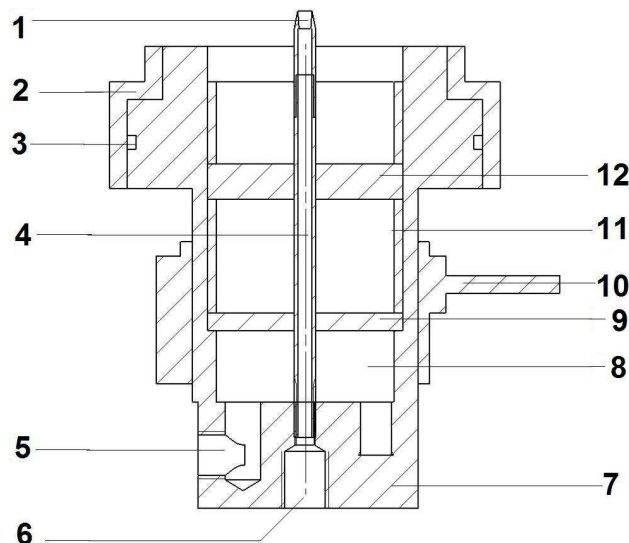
High pressure burner assembled parts. 1: Exchangeable fuel tube tip, 2: Teflon isolation ring, 3: Sealing ring, 4: Fuel tube, 5: Co-flow inlet, 6: Fuel inlet, 7: Burner casing, 8: Chamber for aluminum beads, 9: perforated plate, 10: Heated ring, 11: Support ring, 12: Sintered metal.
